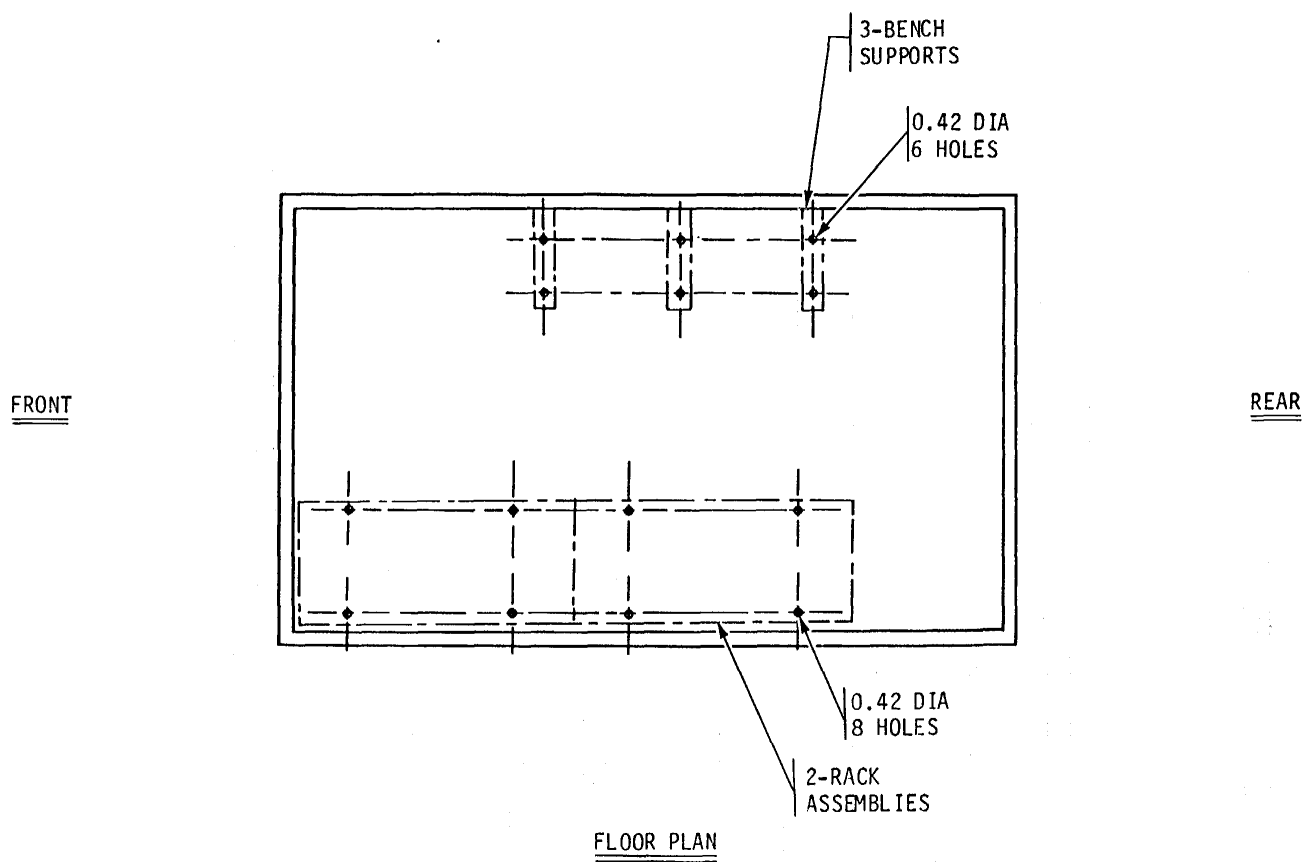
Dimensions for Blind Rivet Nut Holes, Floor Plan, Unit 1, 280.
